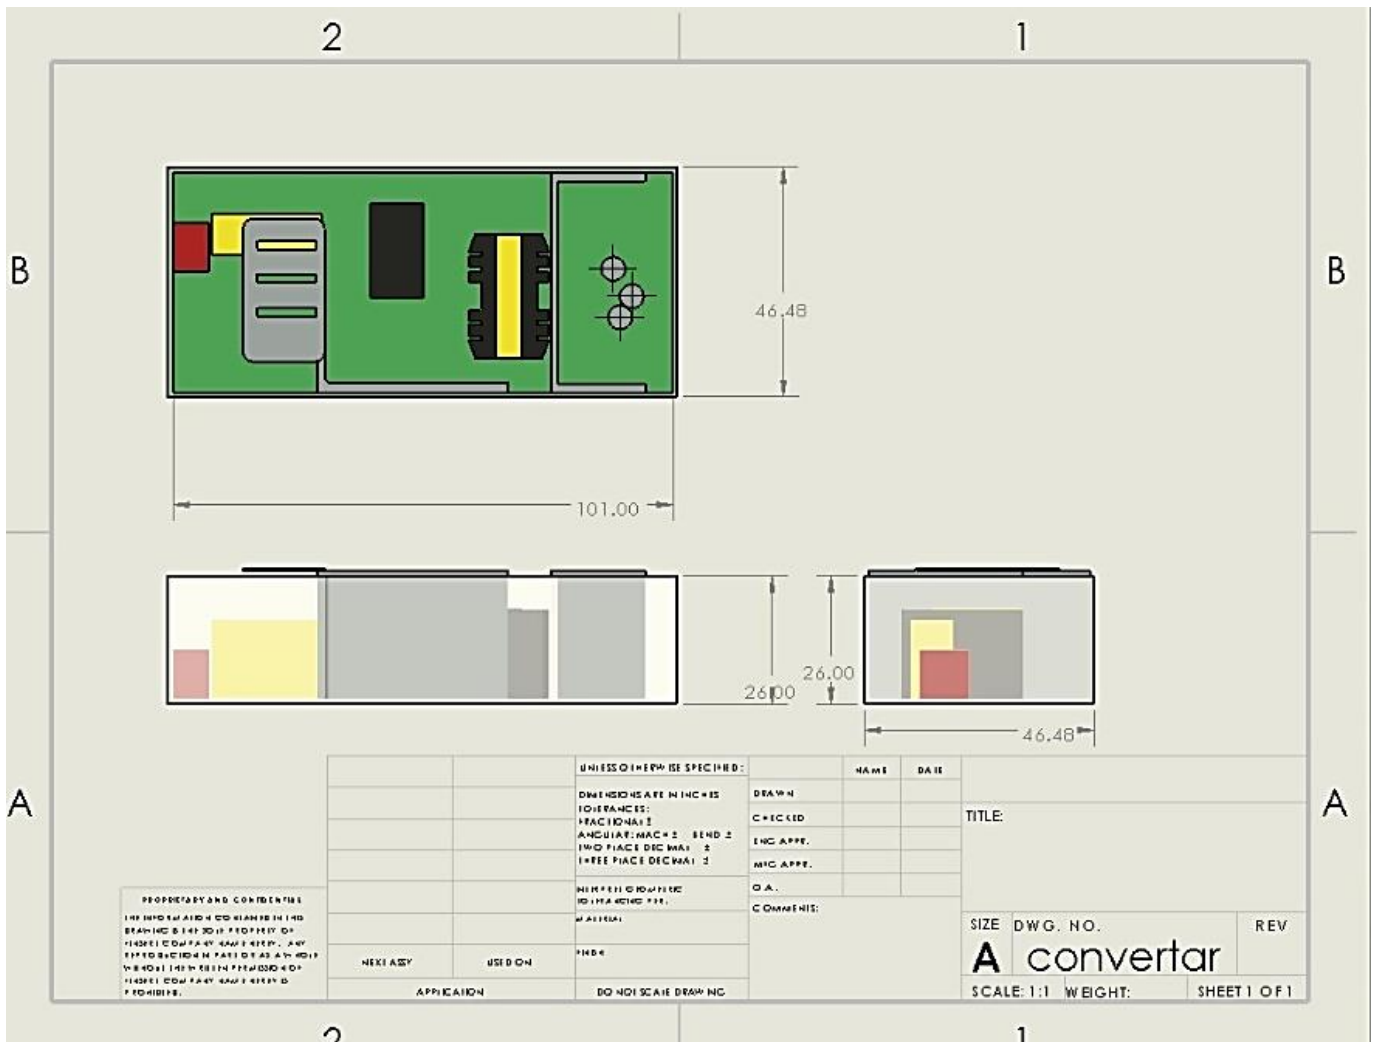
Drawing of Power electronics (*SolidWorks CAD*)
